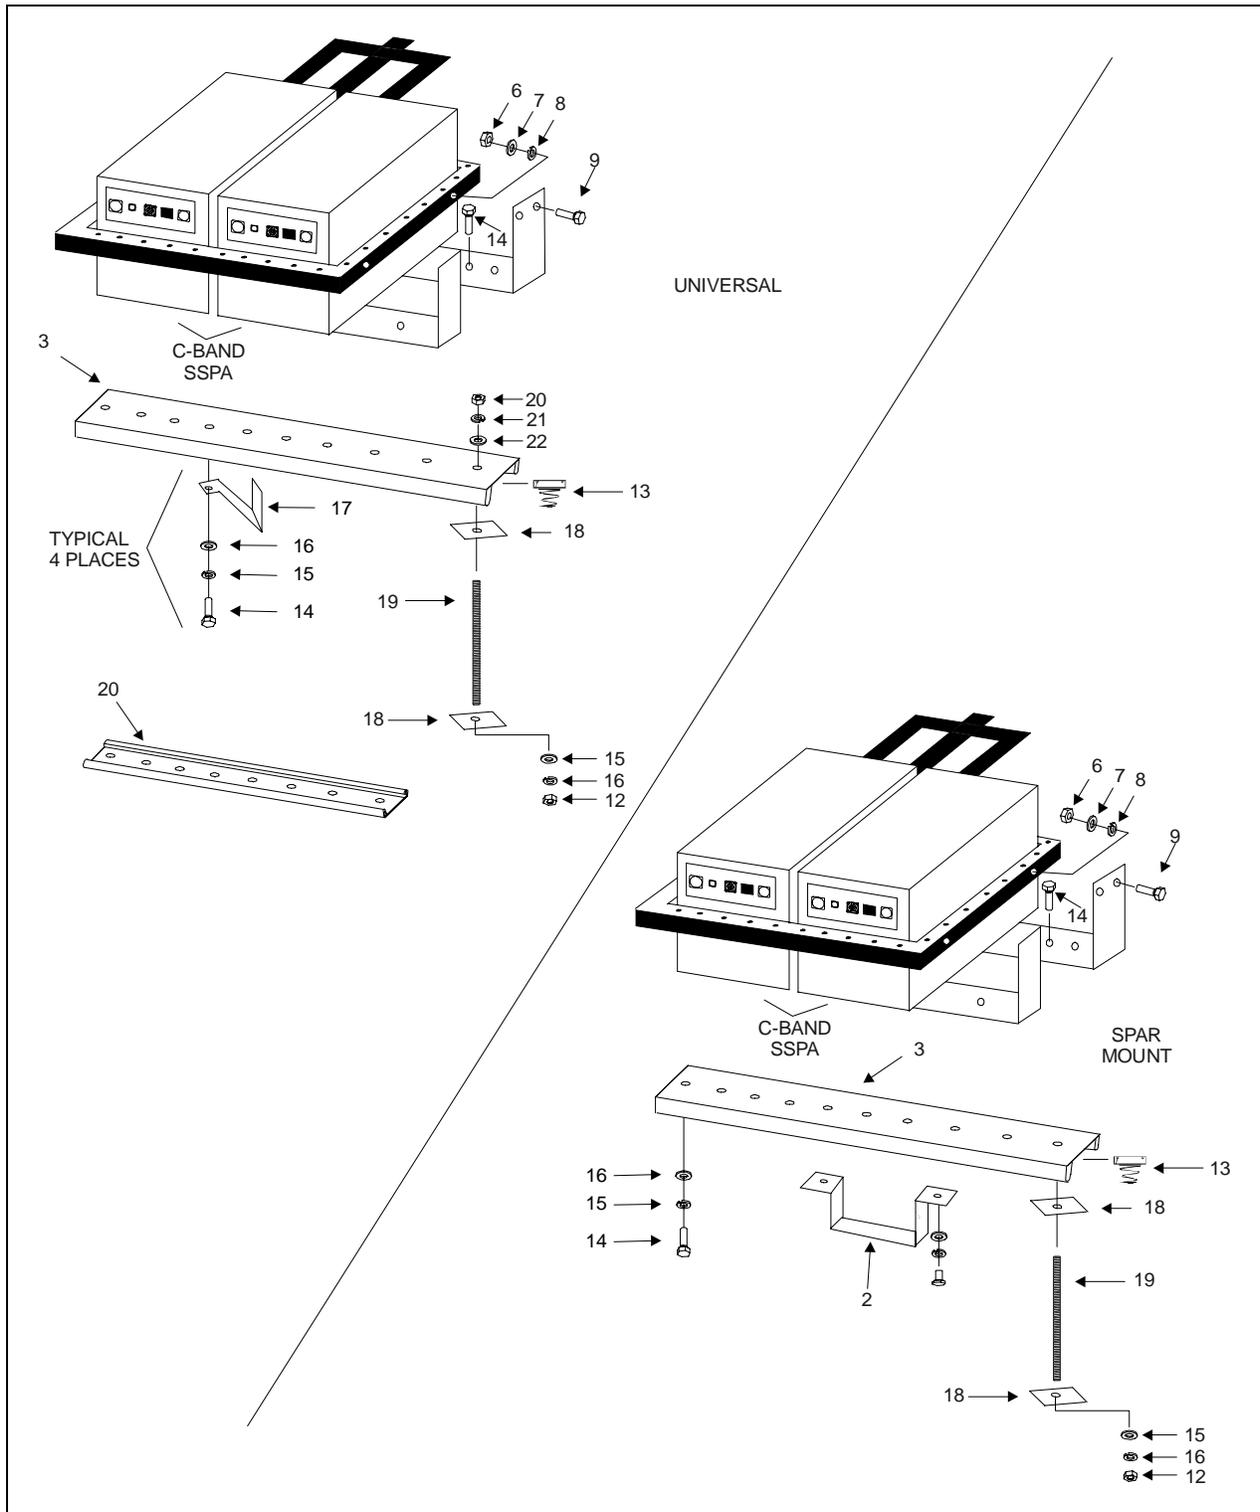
1:1 Redundant System Universal Mounting Kit (KT/6700)
